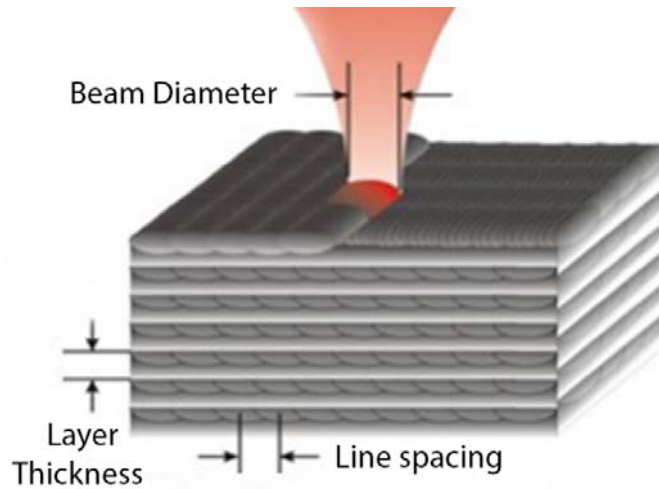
Picture of typical PBF build configuration. Showing build layers and line-spacings. Modified from [43].
